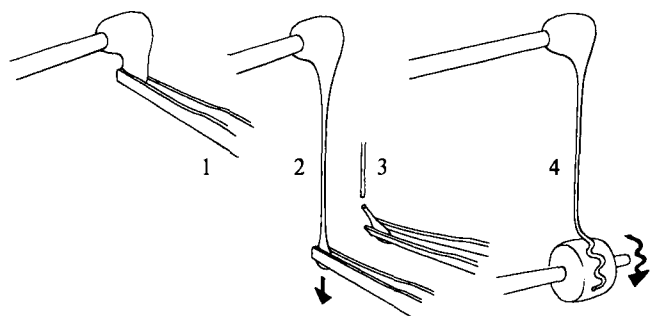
Tweezers can be used to draw out a thread. Drawing F. Bau, FHM.
